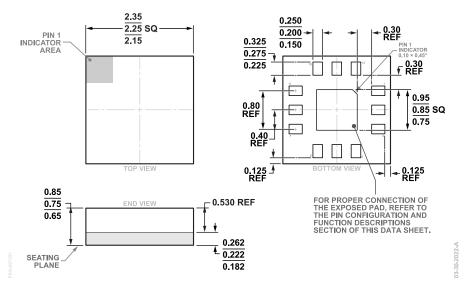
12-Terminal Land Grid Array [LGA] (CC-12-6) Dimensions shown in millimeters
